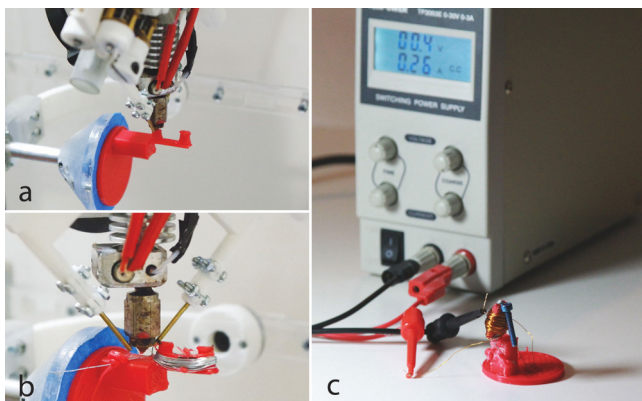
Printing a soft iron core: a) Creation of the pillars printed without support; b) Coiling iron core in an ellipse shape; c) Printed coil magnetically holding a steel bolt.
